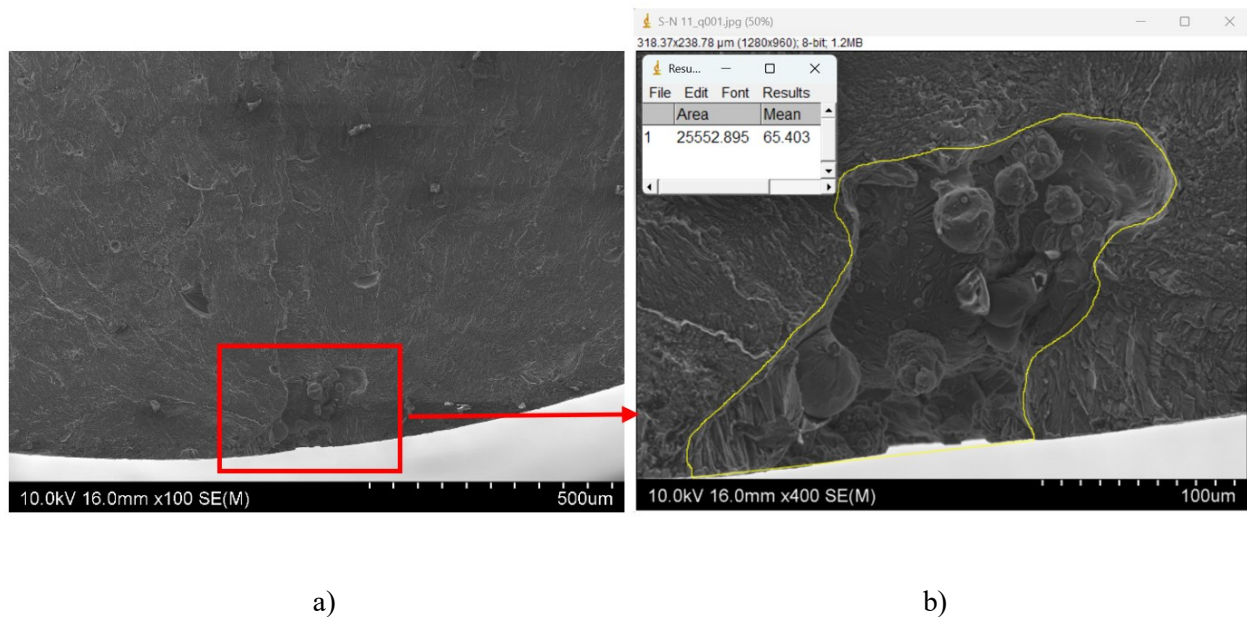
Fracture surface of CD//BD-HT sample tested at 135 MPa a)x100, b)x400.
